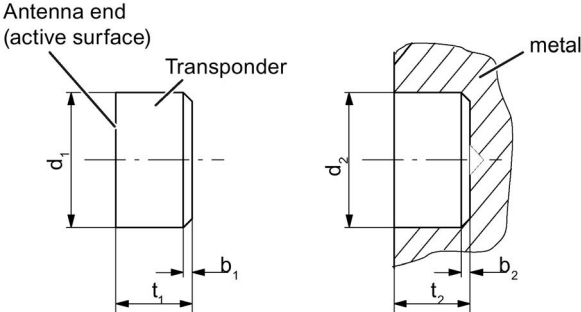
Flush-mounting of MDS D421/D521/E623 in metal with tools
